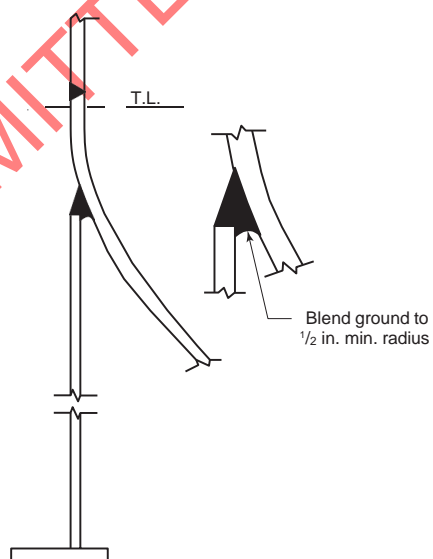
Skirt-to-Shell Detail of a Modified Fillet Weld with an Internal Weld Crotch Radius to Reduce Stress at the Weld
